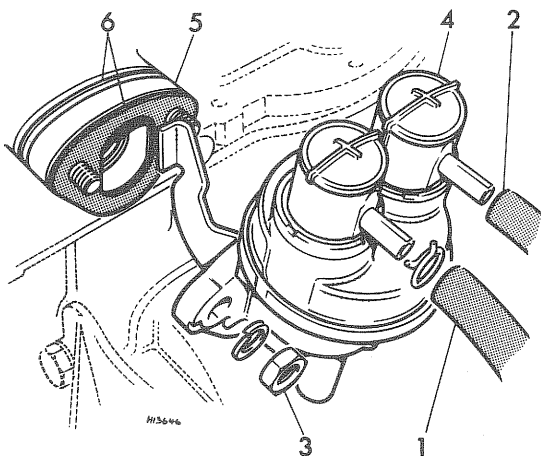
AUF 800 fuel pump removal (Sec 9)
